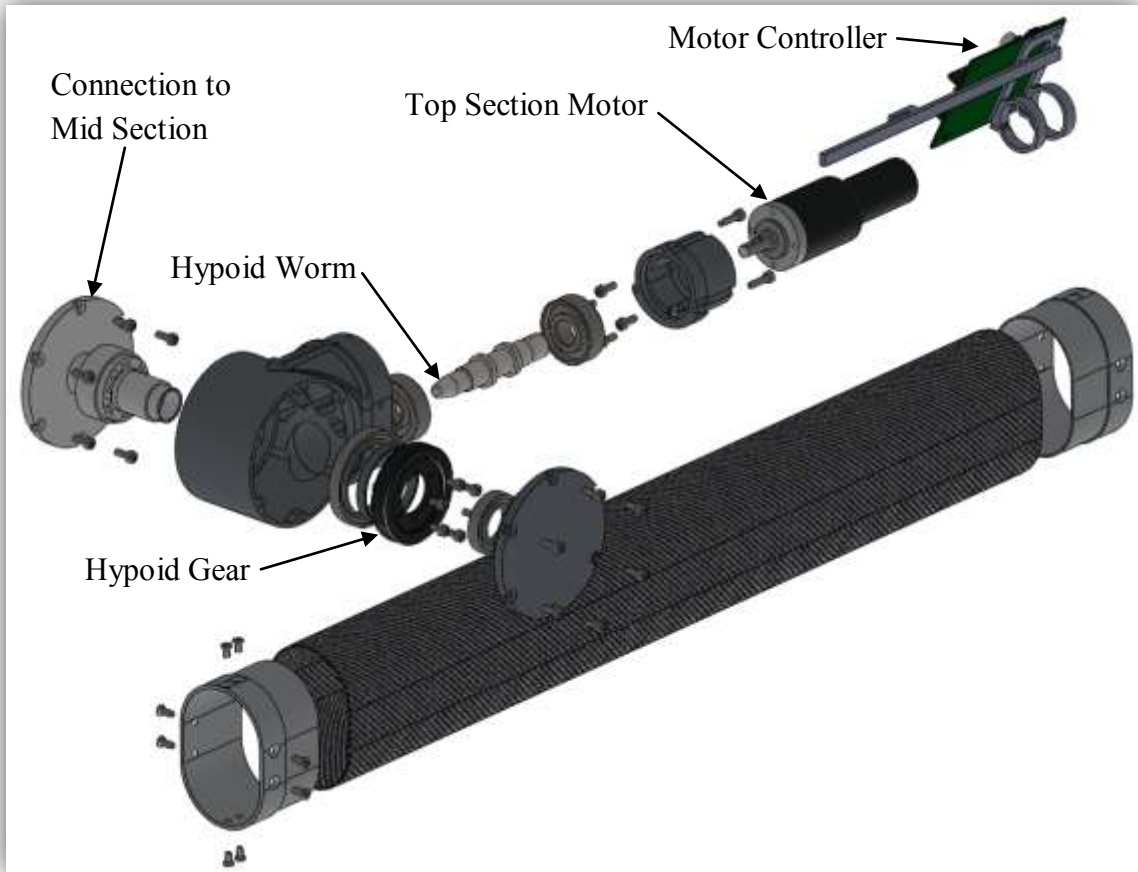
Exploded View of Top Section of Manipulator Arm
